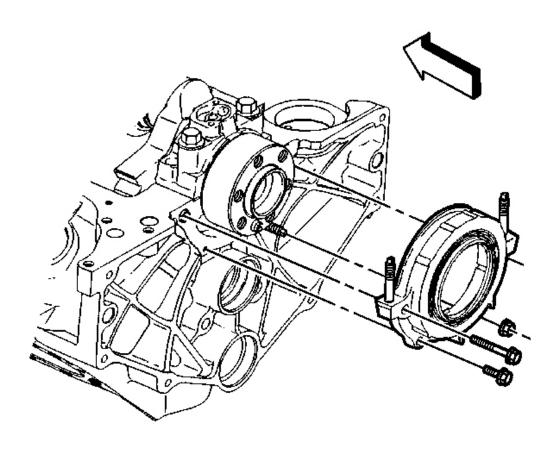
View Of Crankshaft Rear Oil Seal Housing Nut & Bolts Courtesy of GENERAL MOTORS CORP.
